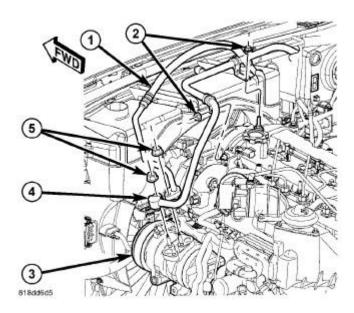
Identifying Refrigerant Lines To Compressor Courtesy of CHRYSLER LLC
